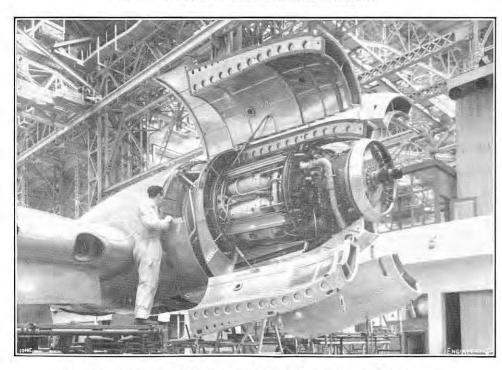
"Proteus 625" Power Plant, Before Fitting Propeller.
